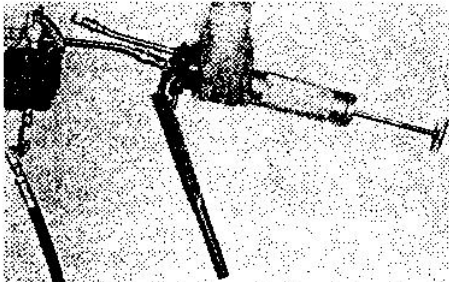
Filling 6594 Gun by means of a separate lubricant pump.
